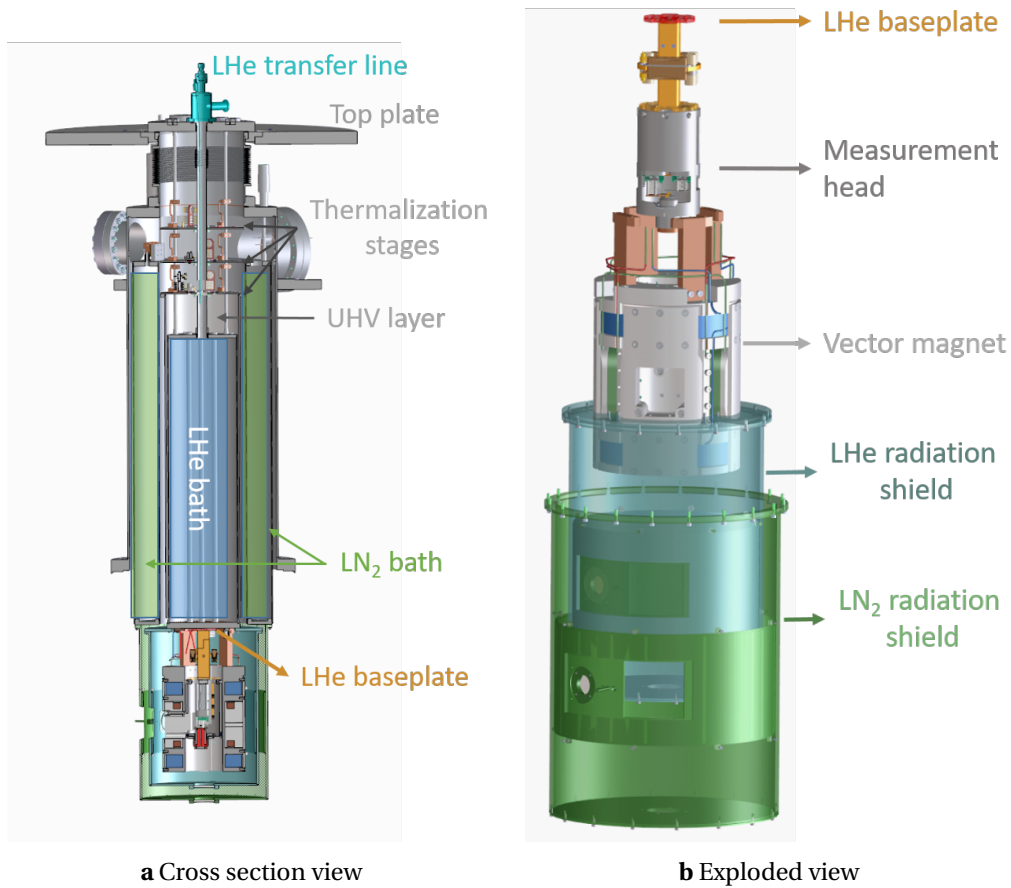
a Cross section view of the cryostat highlighting the LHe bath which is cooled to 4.2 K and the LN₂ bath which is cooled to 77 K. b Exploded view of the cryostat base, showing the measurement head which is surrounded by the 3-axis vector magnet. The LHe and LN₂ radiation shields are thermally coupled to the LHe bath and LN₂ bath respectively.
